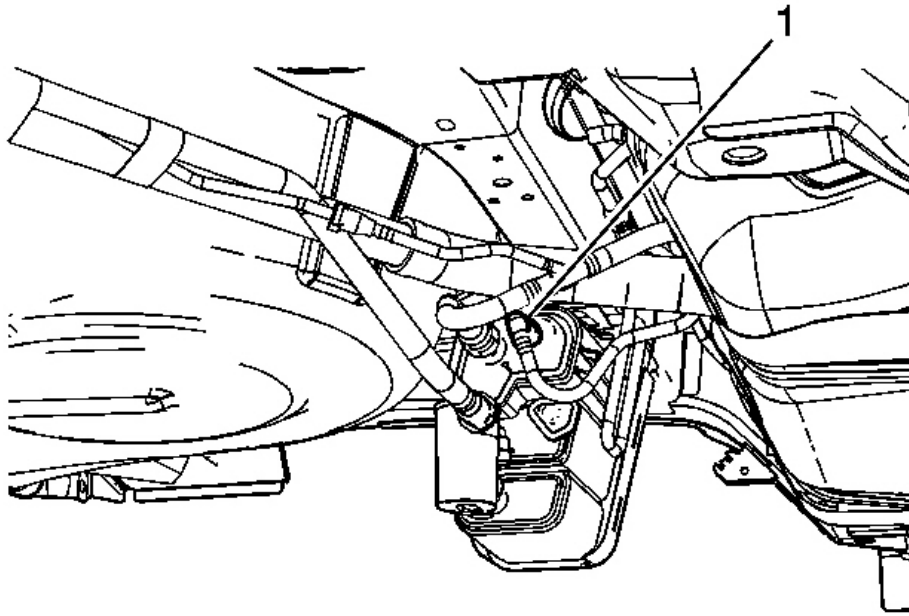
EVAP Chassis Pipe Quick Connect Fitting
